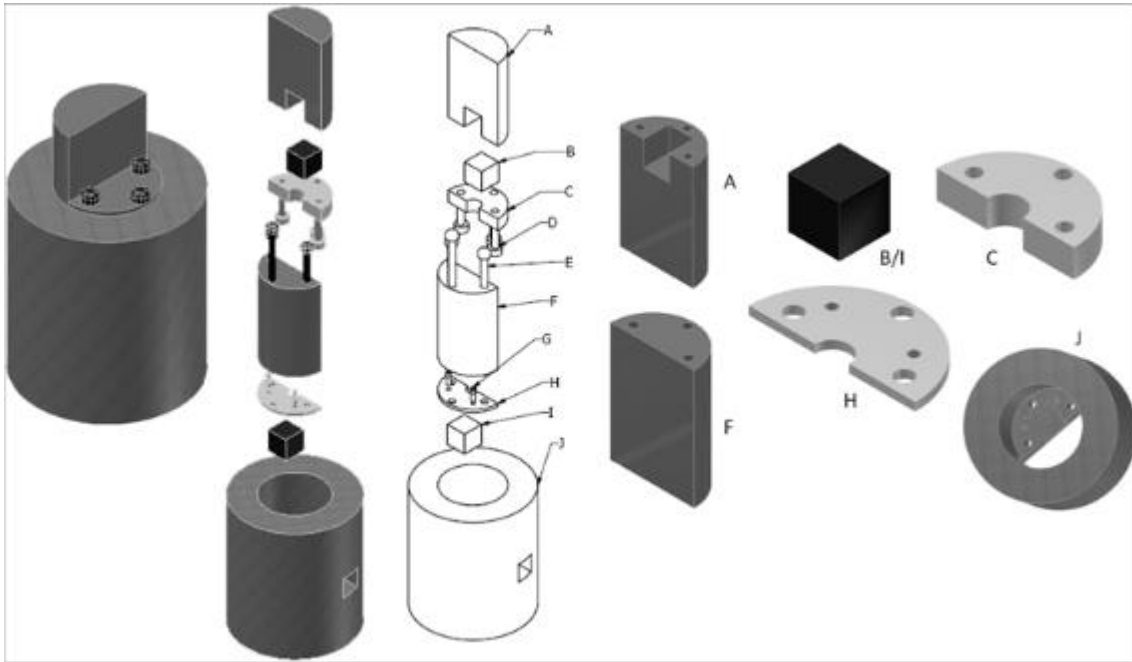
shows the custom-made stainless steel apparatus along with a sliding part armed with a cutting tool.
